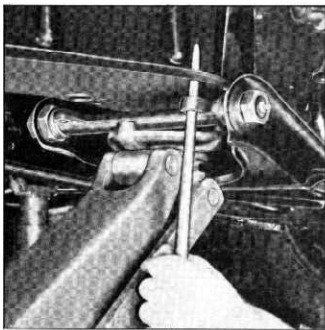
Maintaining Alignment of Lower Control Arm Shaft Bracket
